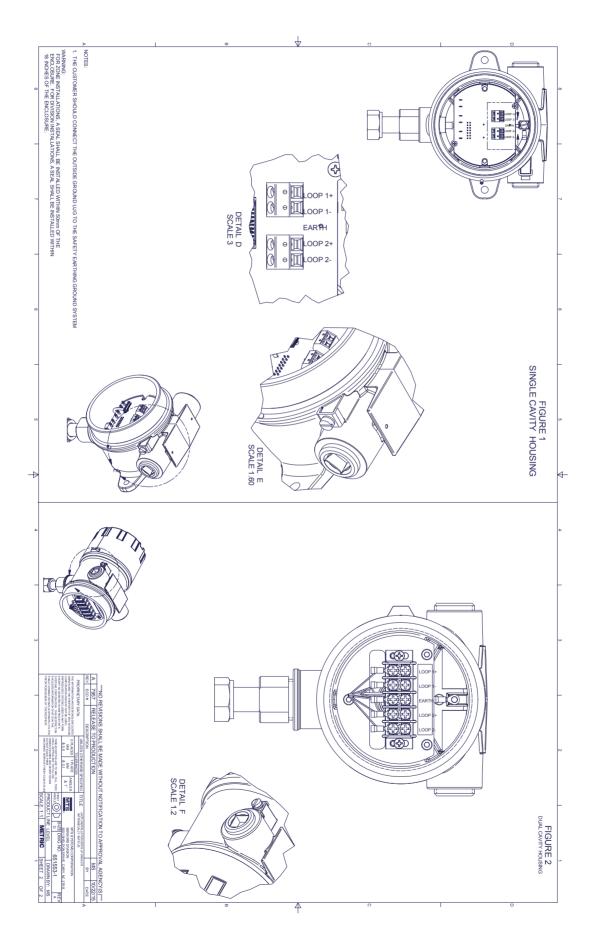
Explosionproof, FM Installation Drawing, Modbus and DDA, Page 2
